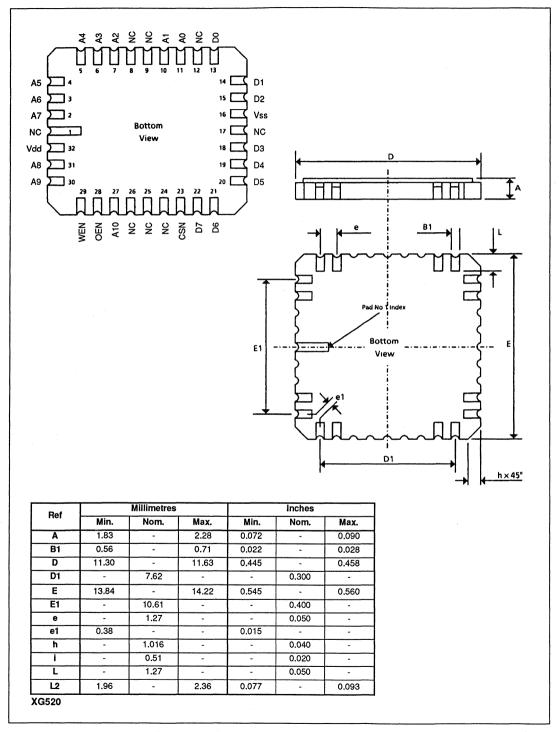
32-Pad Leadless Chip Carrier - Package Style L
